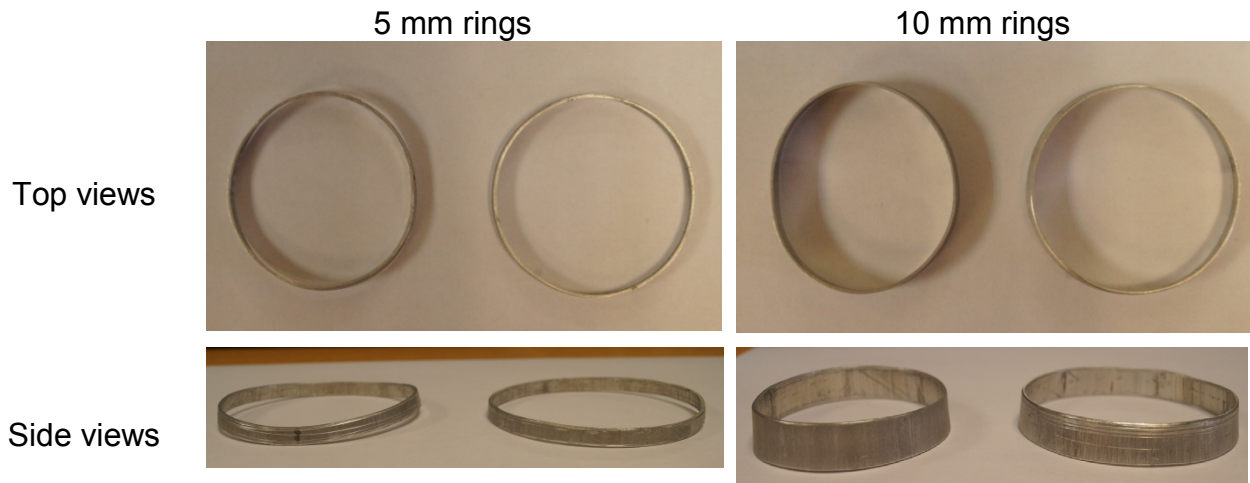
Top views and side views showing the final shape of rings after the expansion test
